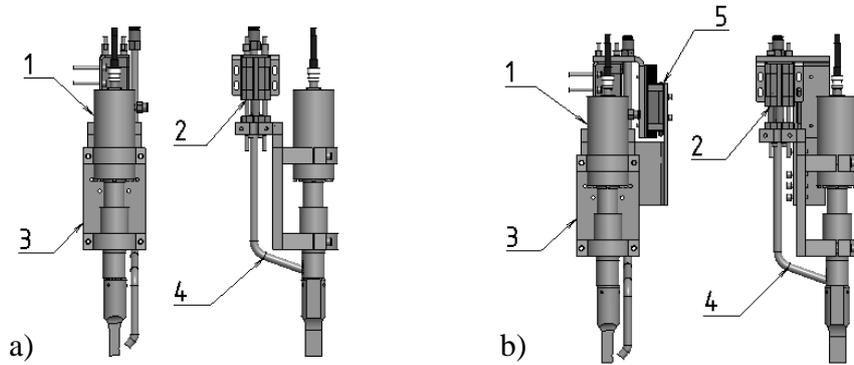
a) Welding head gripping, Variant no.1; b) Welding head gripping, Variant no.2; (1) Sonotrode, (2) Linear conduct, (3) Pneumatic cylinder, (4) Cooling tube, (5) Gripping construction
